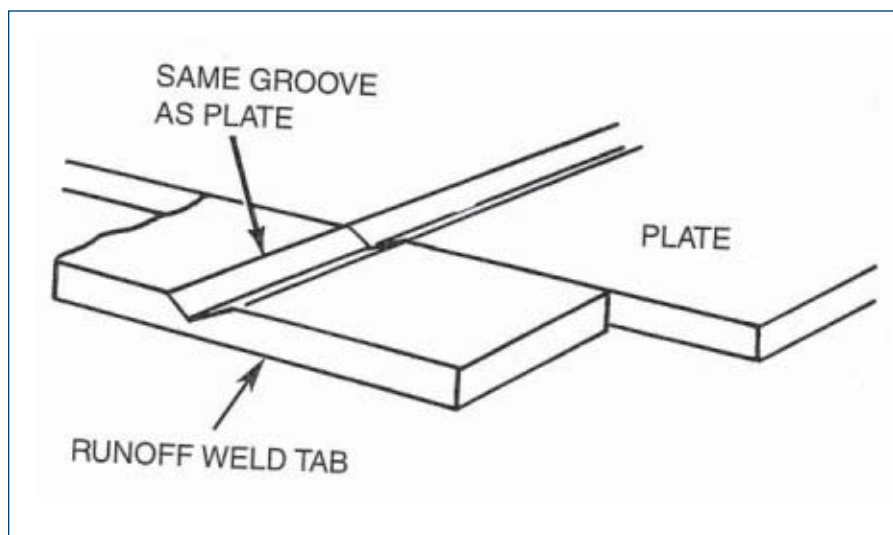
Runoff weld tab at the end of a joint.
